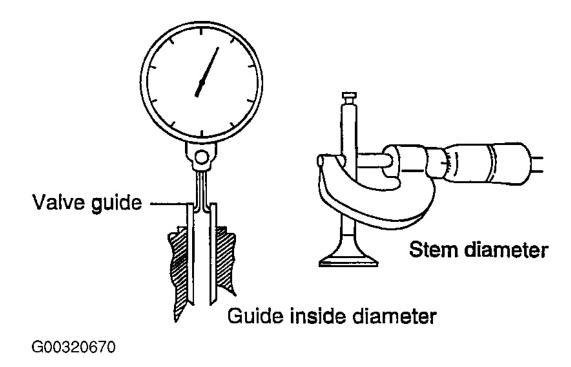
Measuring Valve Guide Clearance Courtesy of KIA MOTORS AMERICA, INC.
